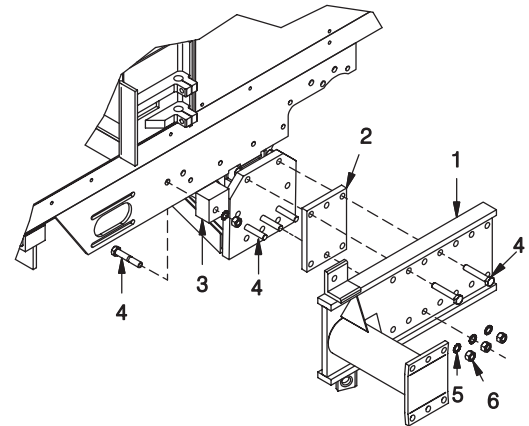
Mounting Spacer Plate & Tandem Plate
